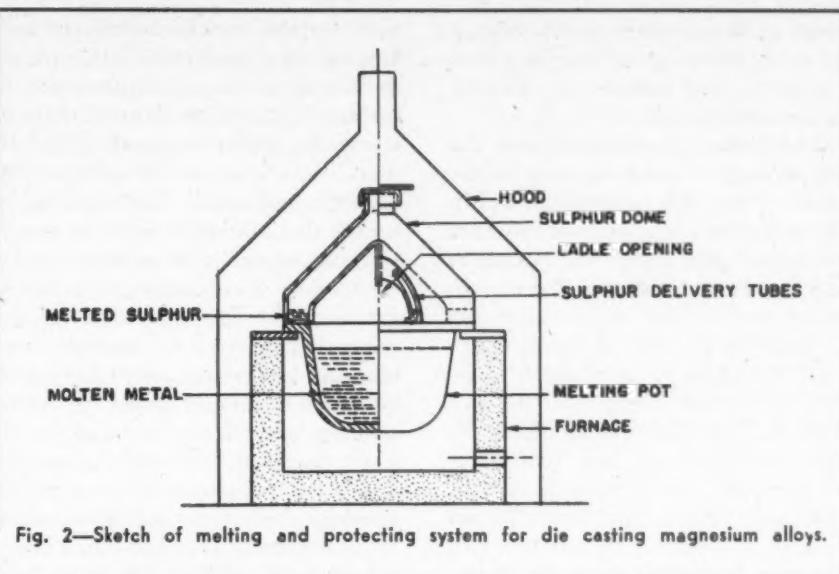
Sketch of melting and protecting system for die casting magnesium alloys.
